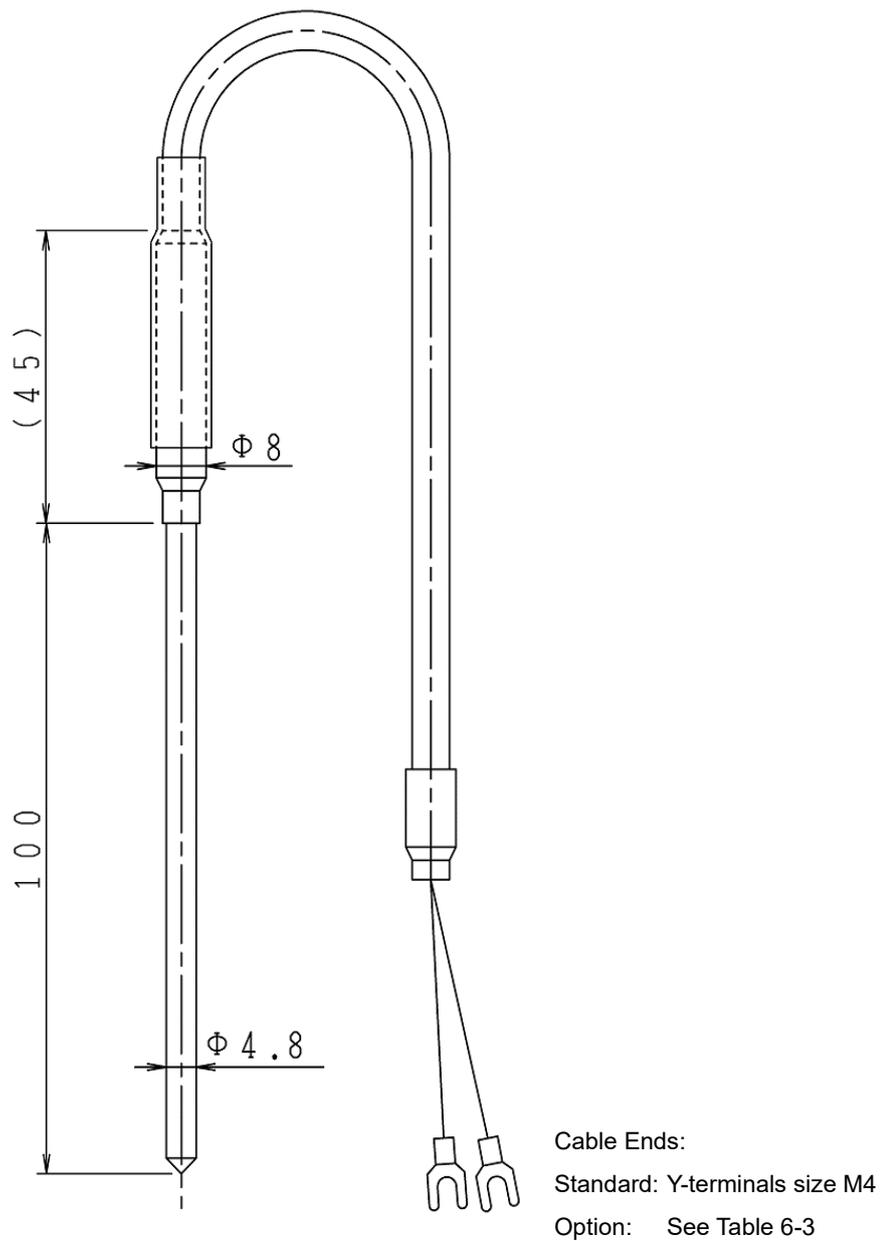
MT-010-T Temperature Sensor Dimensions
